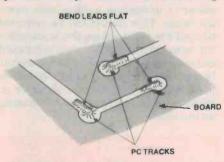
The leads may be cut off and bent to lie flat along the track on the board and then soldered.
